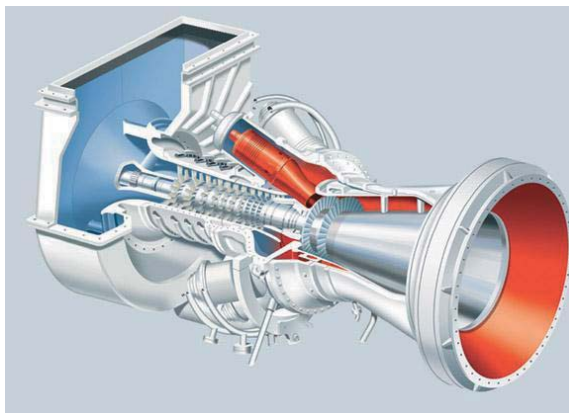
Siemens Energy SGT-300 engine with axial-type exhaust device
